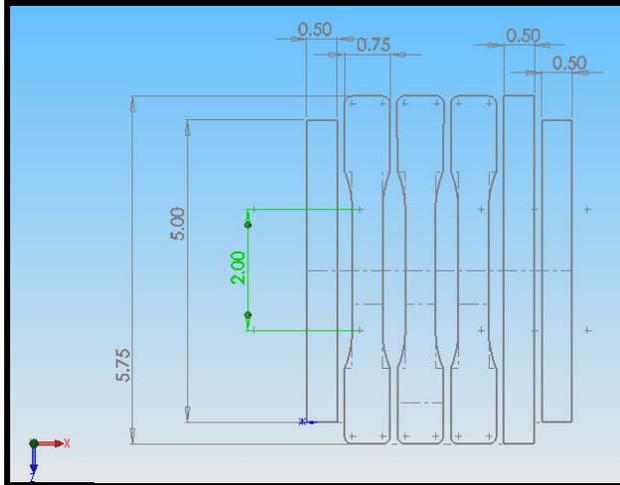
CAD drawing used to waterjet cut test bars for mechanical testing
